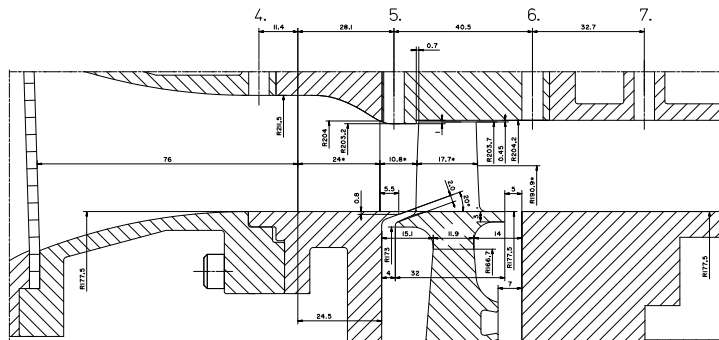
Drawing of KTH's test turbine with stage 5 mounted, hot dimensions
